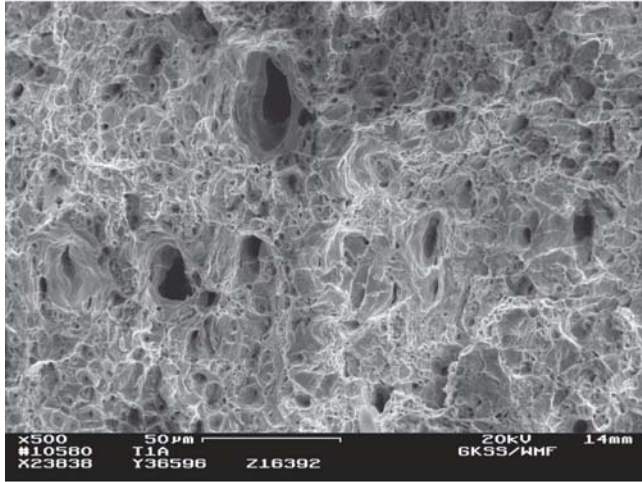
Microstructure of the DSS HAZ-weld metal interface in weldment A
